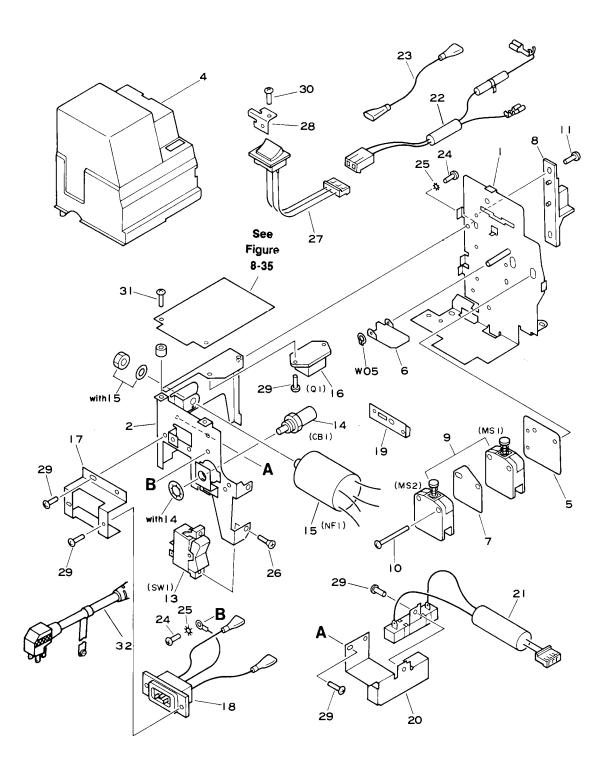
Power Interlock Assembly-220/240 $\,\mathrm{V}$
